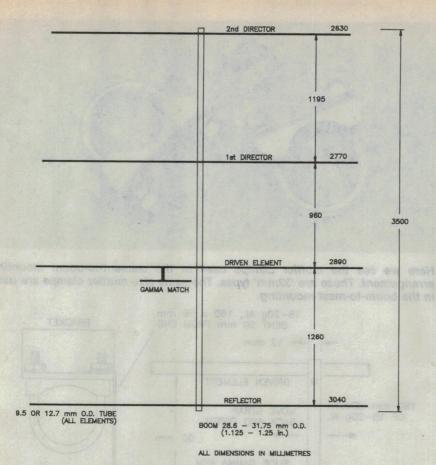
General design dimensions of the four element 50MHz Yagi, centred on 50.1MHz. Note that the inter-element spacings are centre-to-centre dimensions. However you can assume a 5mm tolerance on all dimensions. The elements can be cut from 12.7mm or 9.5mm o.d. aluminium tubing, but the ends of each element in the author's beam were 9.5mm tubing slipped inside 12.7mm tubing. The construction alternatives for the elements are discussed in the text.
